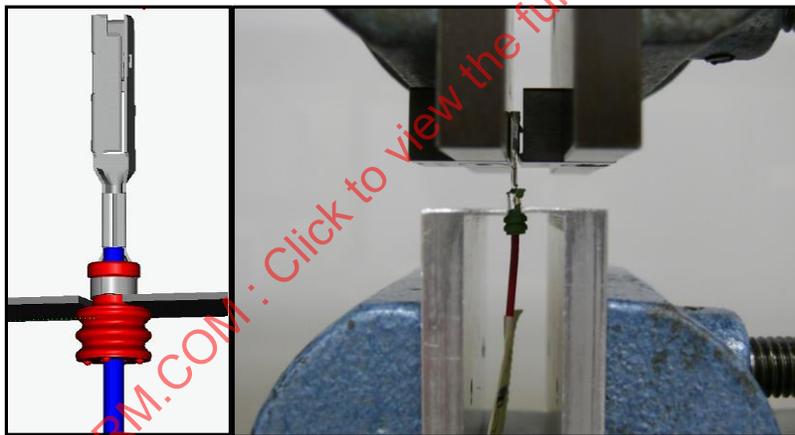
FIXTURE EXAMPLE FOR APPLIED CABLE SEAL RETENTION TEST
